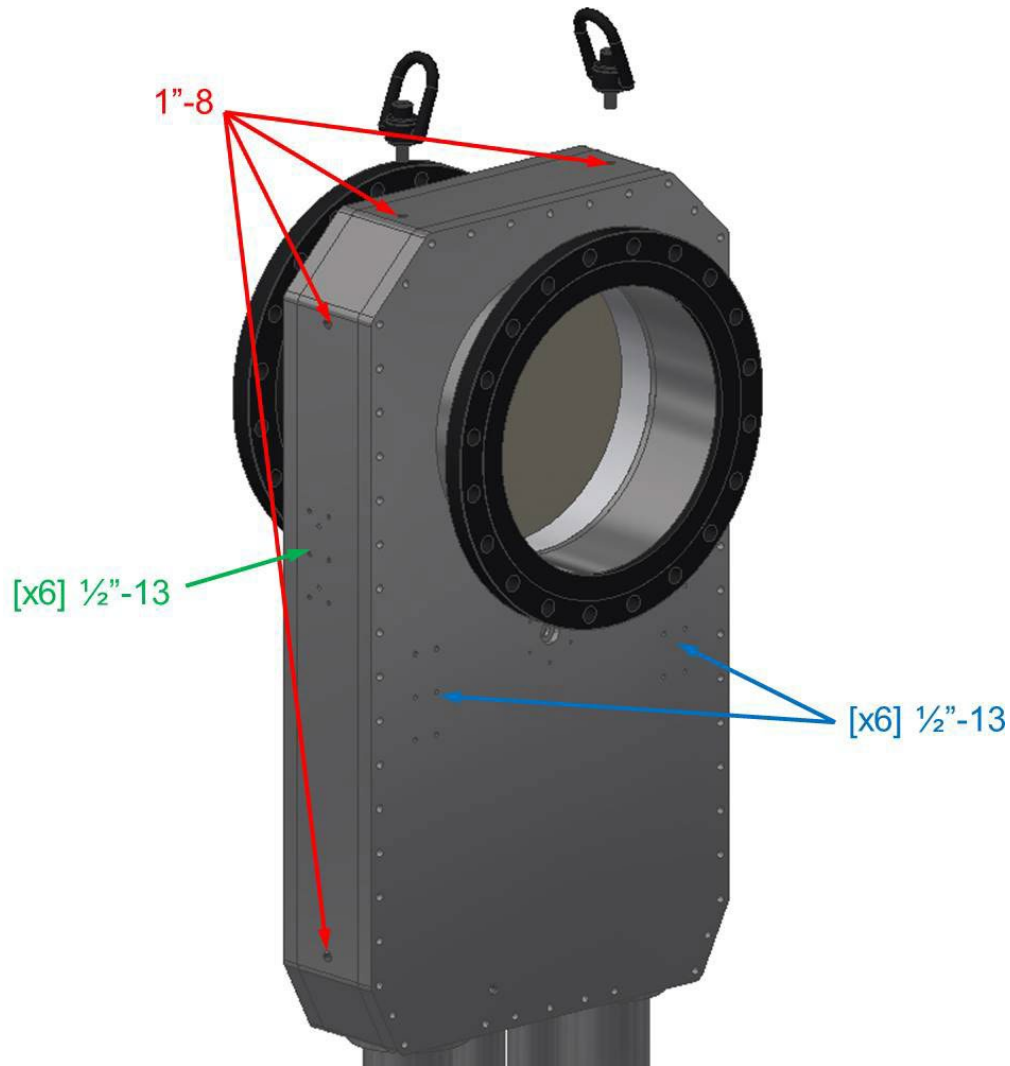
Thread specifications for FV lifting/mounting hardpoints. Note, all thread callouts have a mirror-image feature twin on FV surface not shown in this isometric view.
